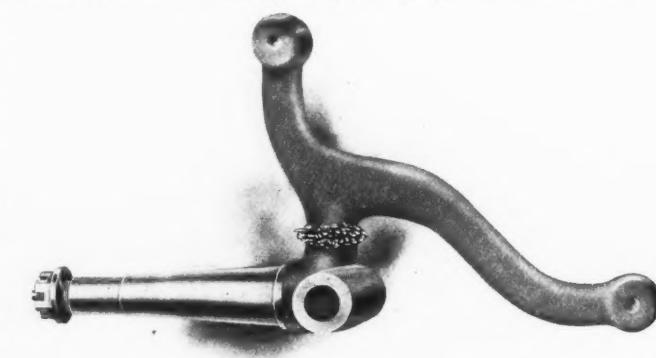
Welding Operation on Automobile Steering Knuckle and Lever.
